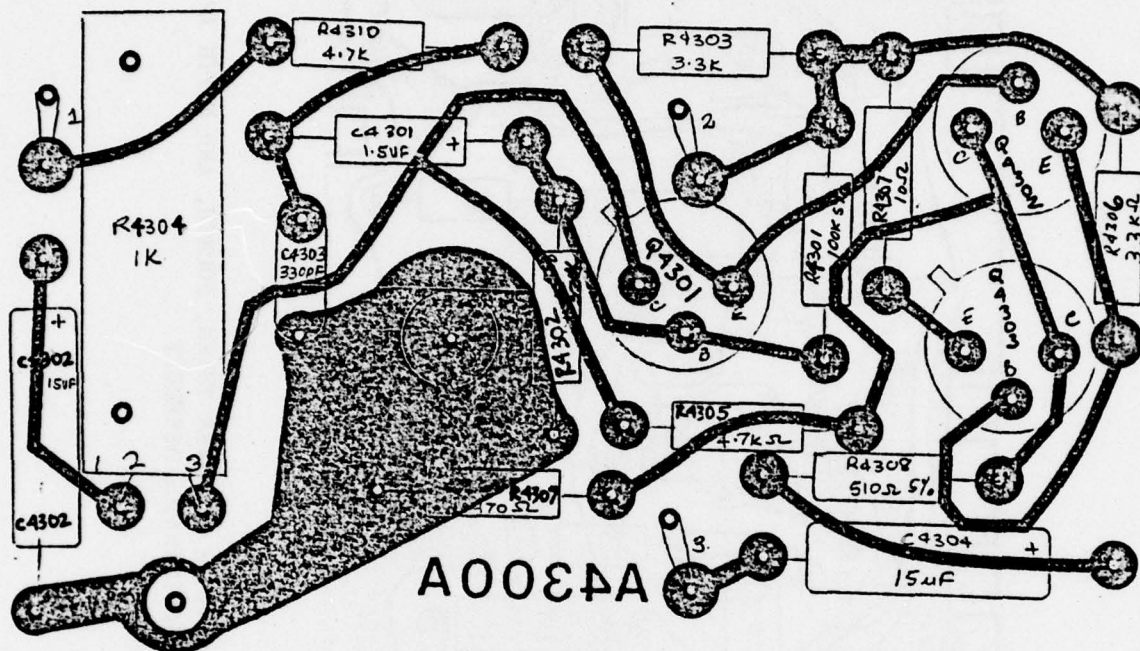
P.C. BOARD LAYOUT FOR THE A4300A AUDIO AND SQUELCH PREAMPLIFIER ASSEMBLY
